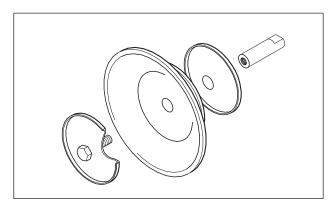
Assembly of standard diaphragm with inner and outer plate
